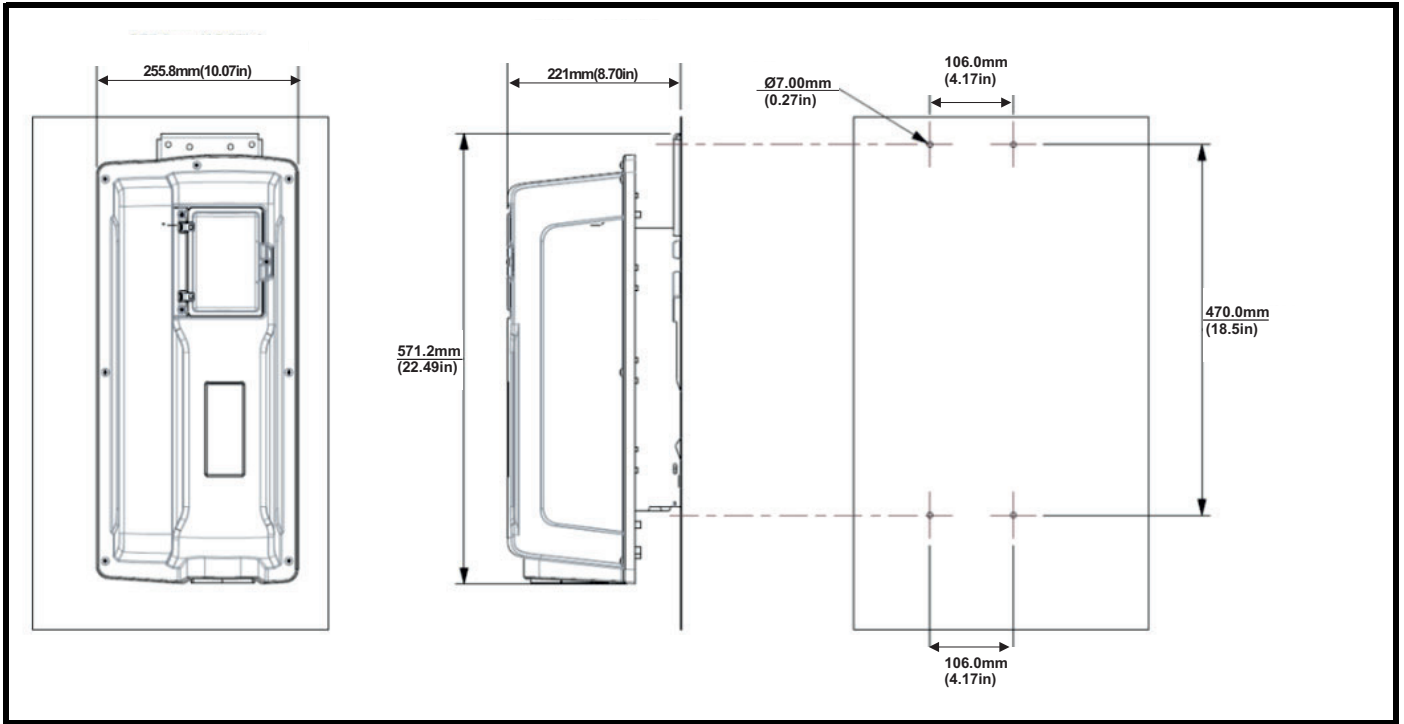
Size 5 High IP Drive and Mounting Hole Dimensions
